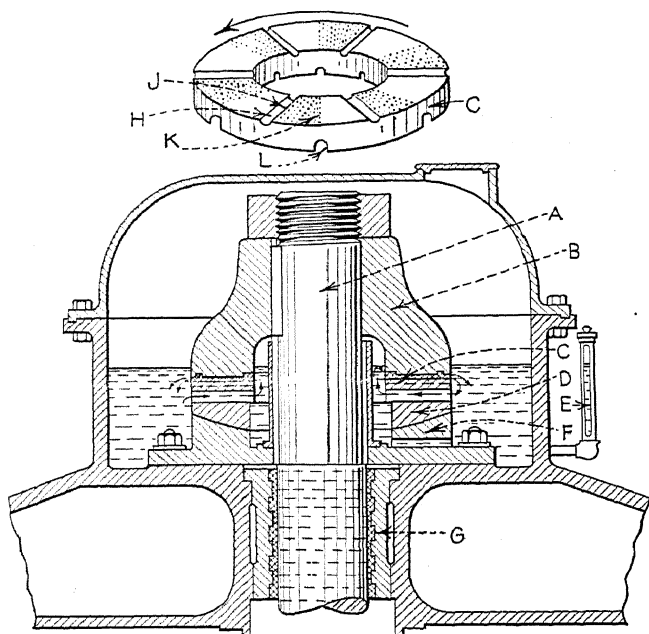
Suspension bearing for hydraulic turbine. (Courtesy Vacuum Oil Company.)
